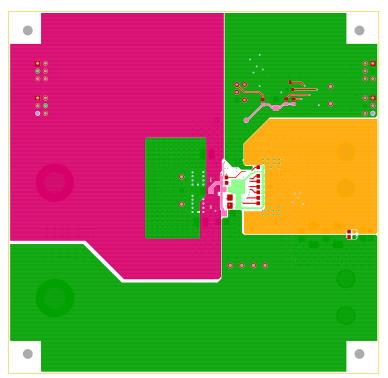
BOTTOM LAYER SOLDER SIDE
